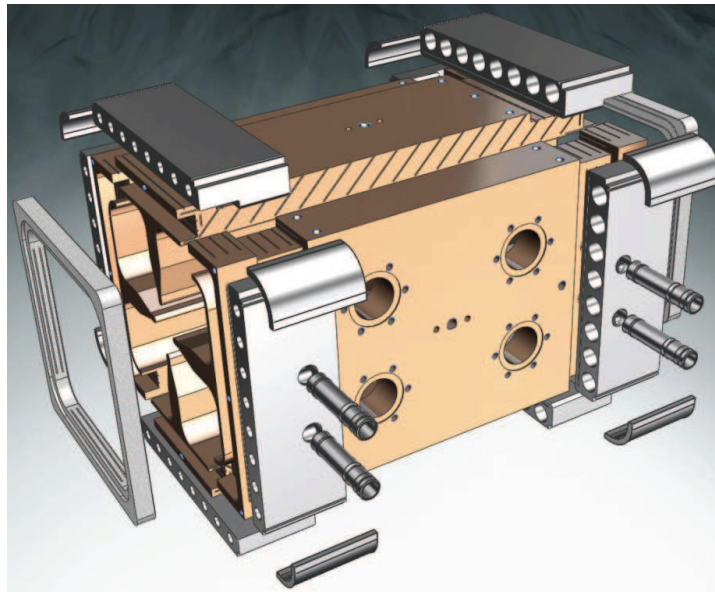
Exploded view of the small scale prototype RFQ for vertical one step brazing test
